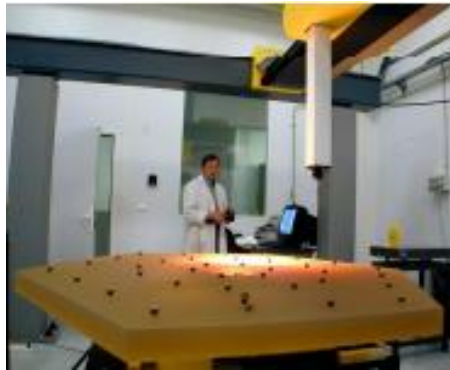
Large 3D CMM used for GTC mirror segments.¹⁰⁷
